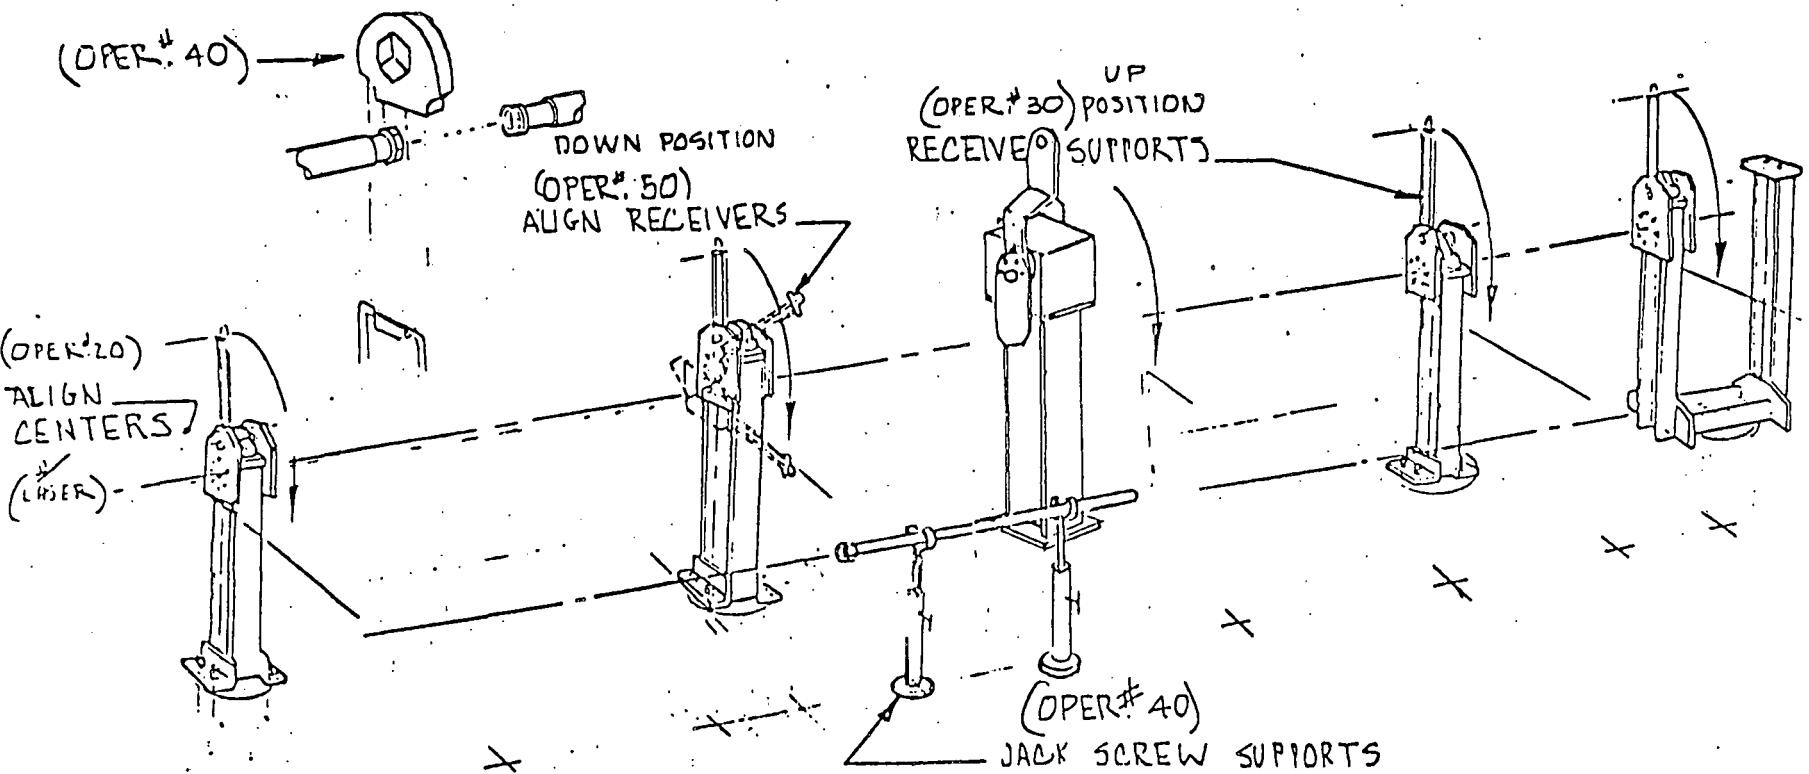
80 FT. COLLECTOR MODULE ASSEMBLY
